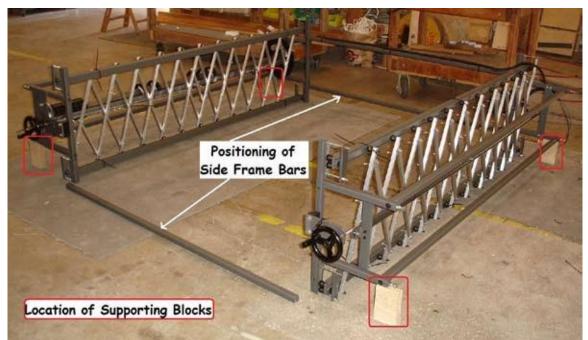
Arrangement of Module Frame Pieces for Assembly
